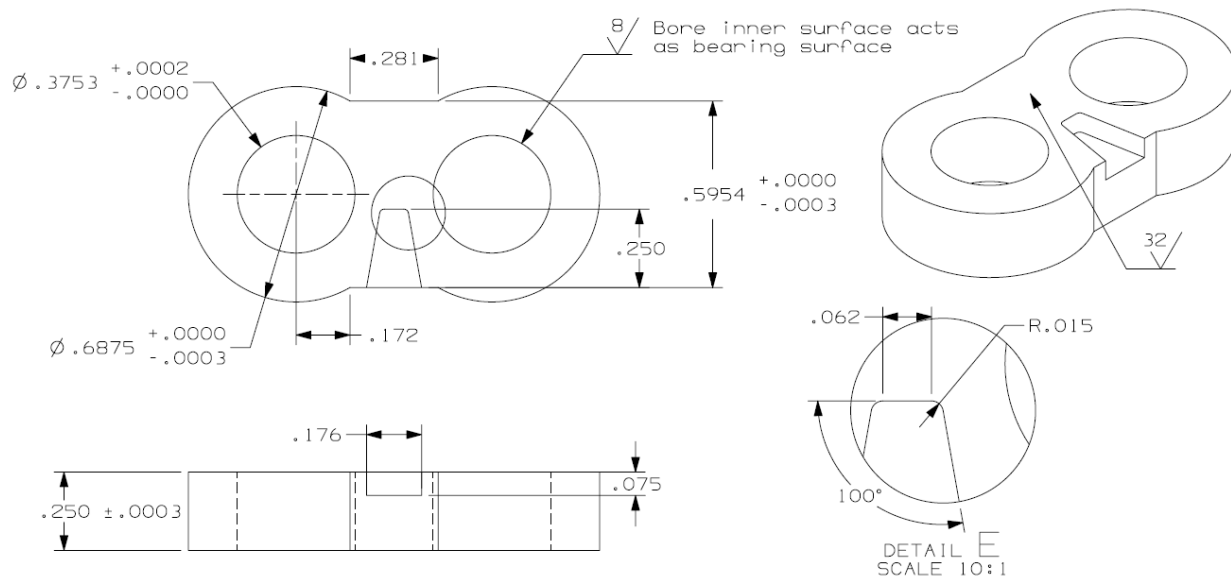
Example draft of a wear plate and key tolerances
